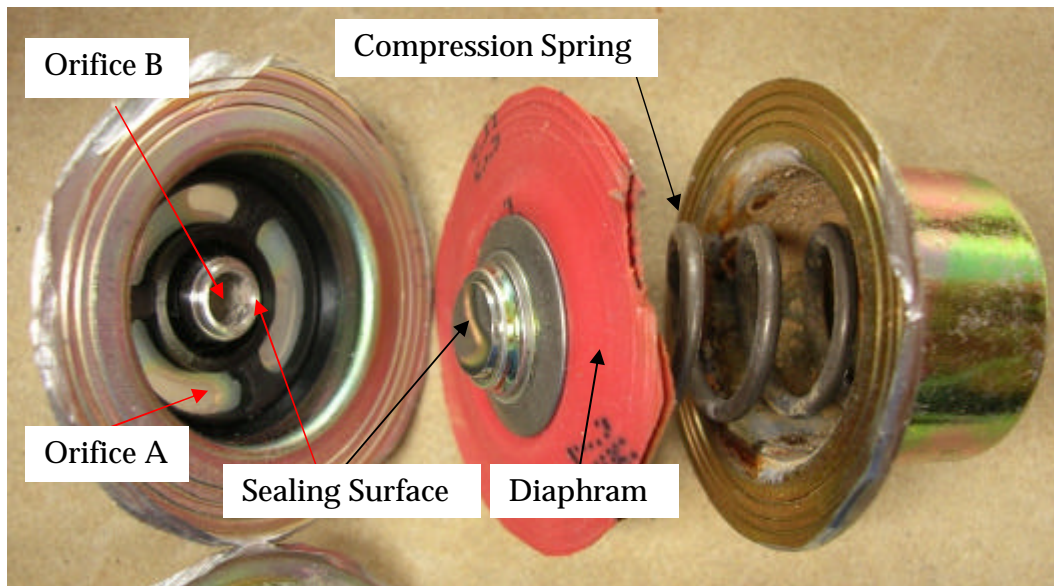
Plymouth Grand Voyager - fuel return line valve - disassembled.
